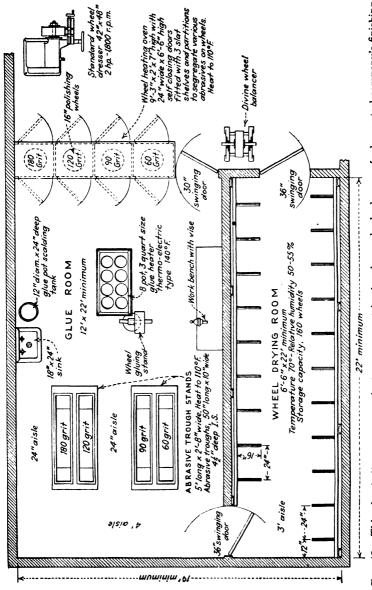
This plan indicates a convenient arrangement in the glue and wheel room of a large steel company's finishing department.
